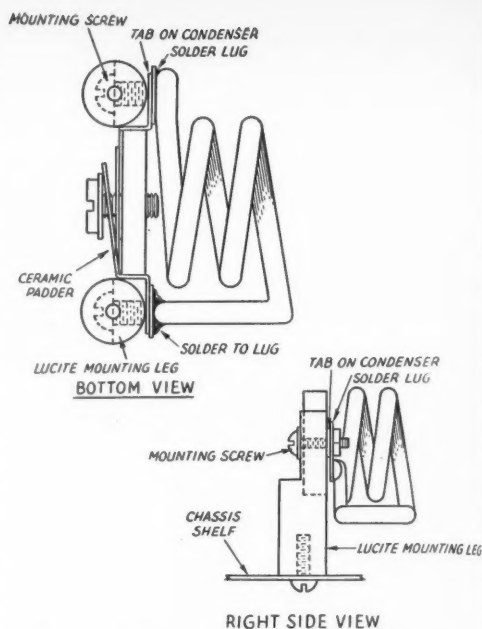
Bottom and side views showing construction of the fixed-tuned transmitter tank assembly.
